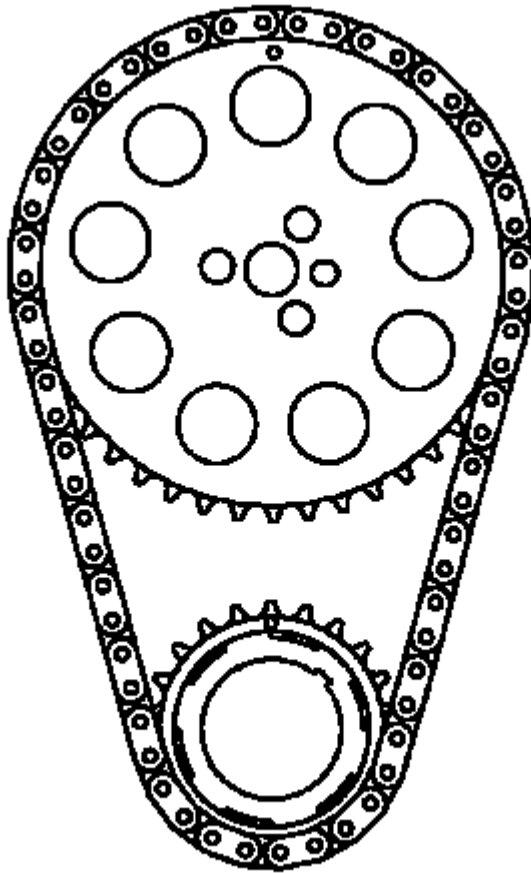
View of Crankshaft/Camshaft In Position For Number 1 Piston At TDC
